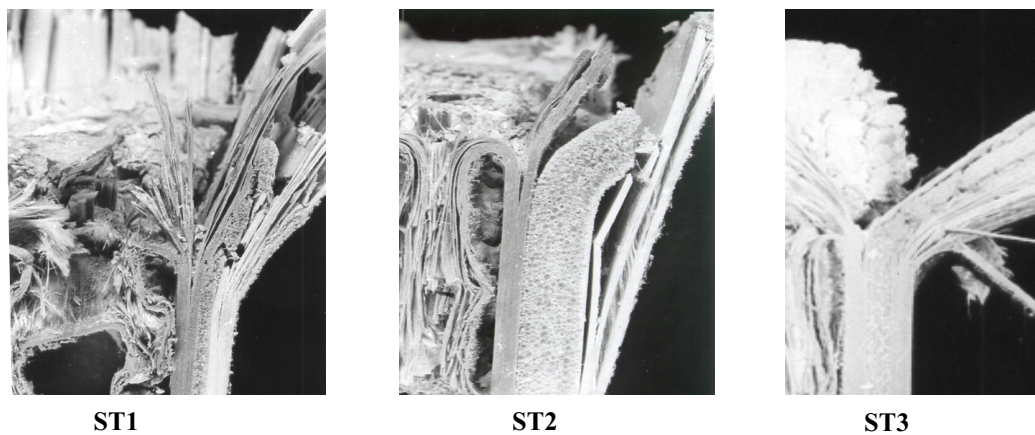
Fracture morphology of sandwiched tube with the tulip trigger
